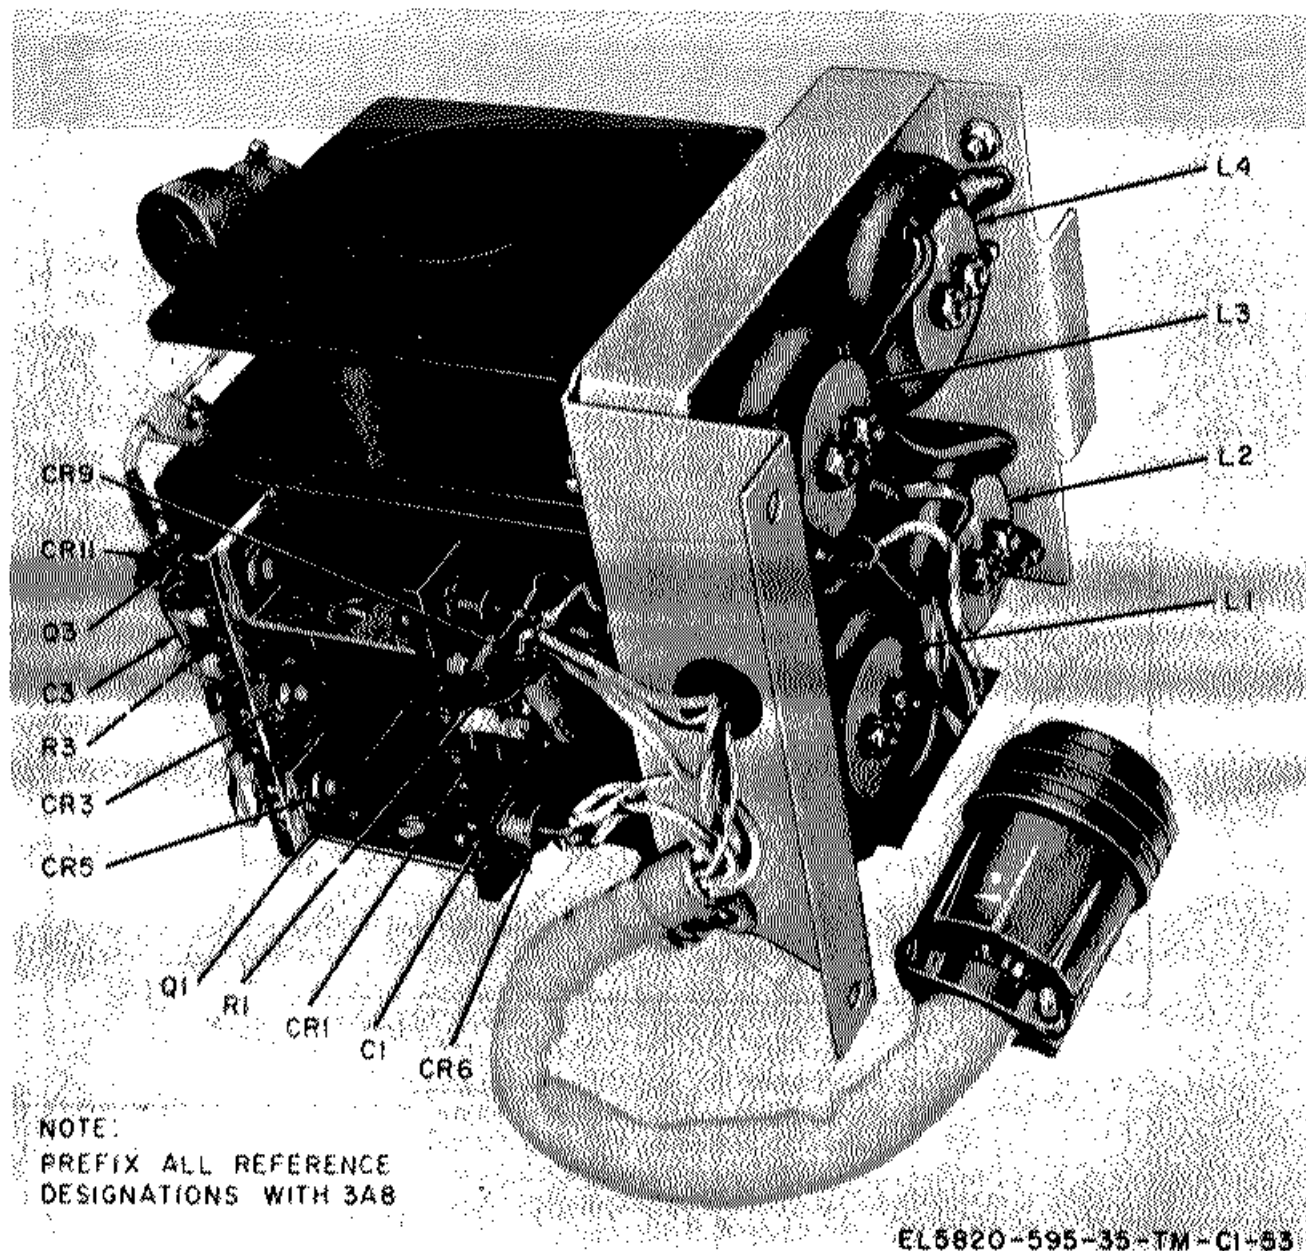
Inverter 3A8, front oblique view, parts location diagram.
